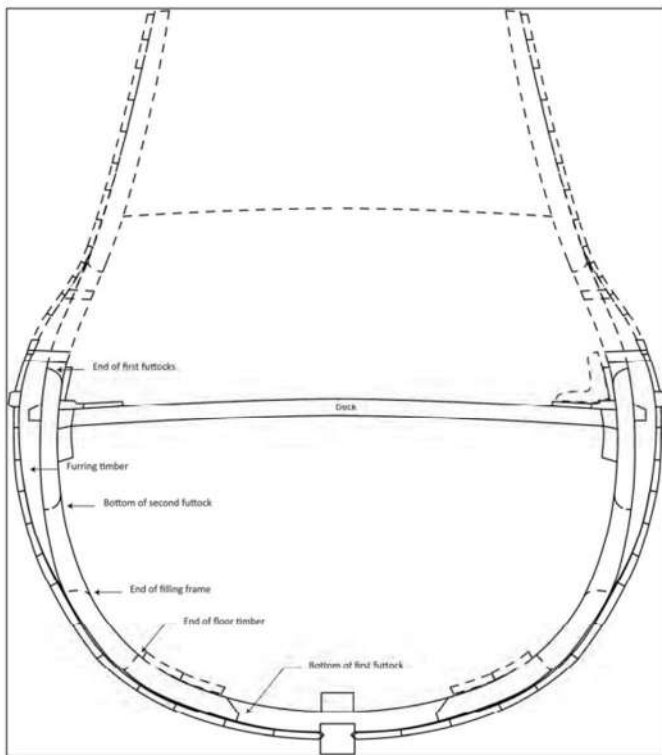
Reconstructed midships section showing the layout of framing timber (M. Ditta)
